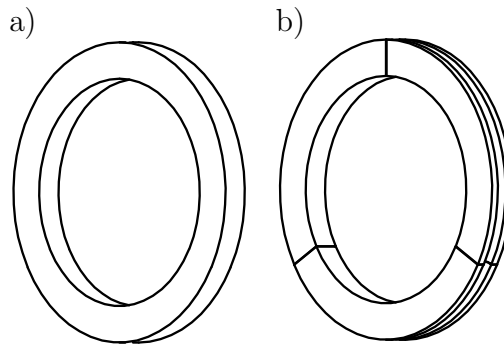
Overview of backup rings in a packing: a) solid (i.e. single piece, uncut) backup ring, b) 3 piece radial cut backup ring.
